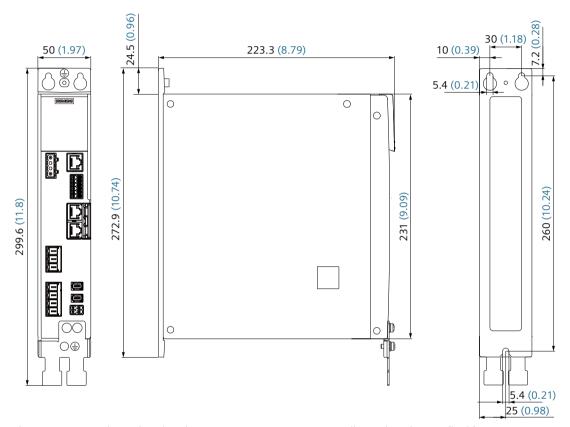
Dimension drawing SINAMICS S210 FSA, 3 AC, dimensions in mm (inch)
